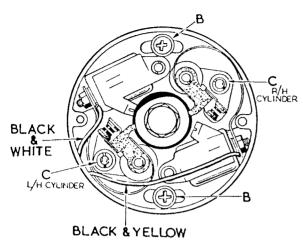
Contact breaker and condenser assembly (1966-67).
